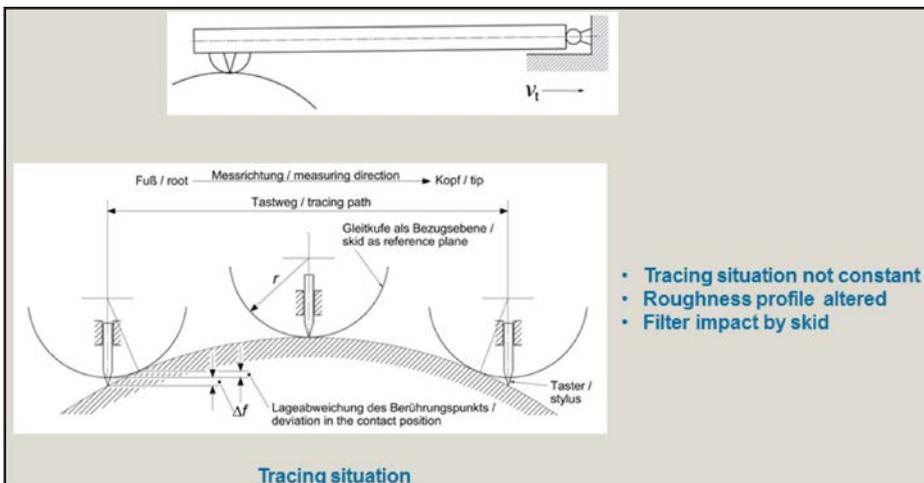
Probe system with side mounted skid probe (VDI/VDE 2612 Sheet 5).
